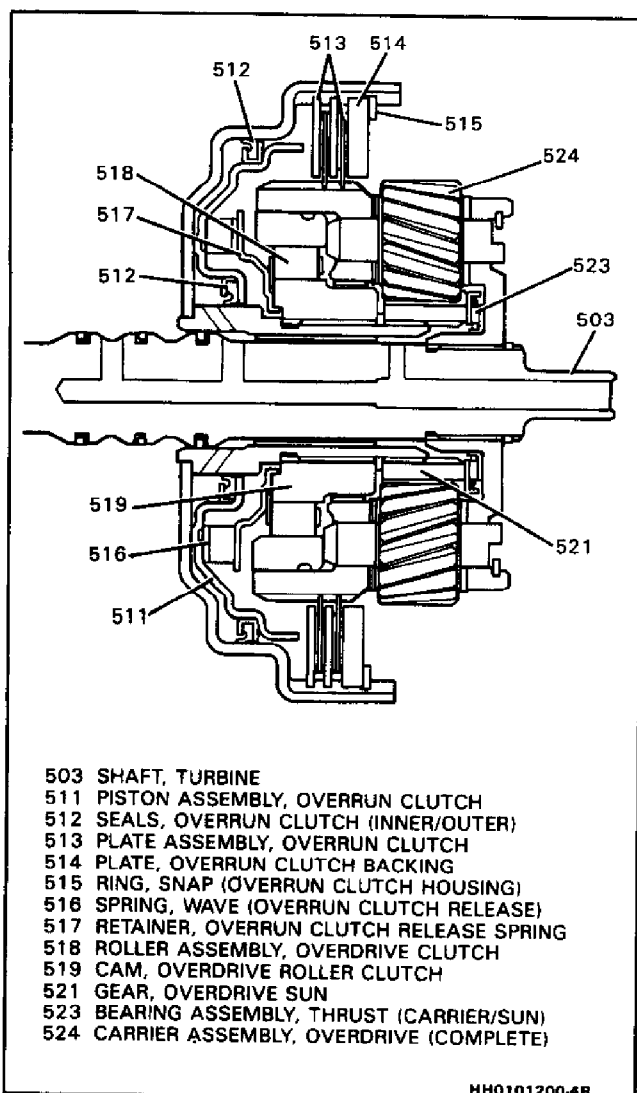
Overrun Clutch and Overdrive Carrier Assemblies
